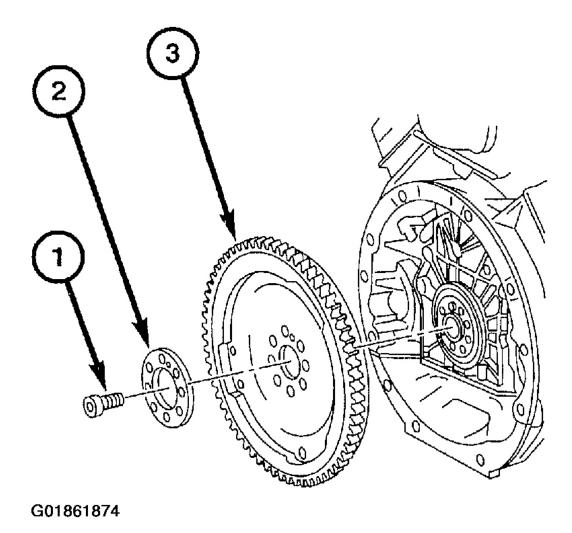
Removing Flywheel Bolts, Spacer & Flywheel Courtesy of DAIMLERCHRYSLER CORP.
